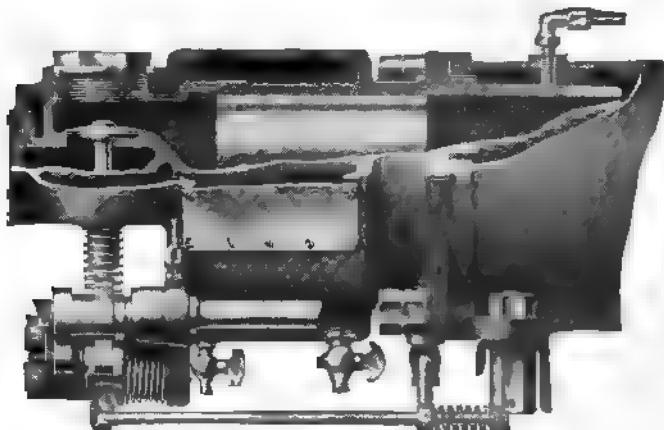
Part Sectional View of the Olds Motor, showing valve-operating mechanism. The cam-shaft, extending horizontally to the head of the motor, actuates a rocking cam, which in turn pushes both the inlet and exhaust valve stems, projecting below the motor head. The cam shaft is rotated by a helical gear from the main shaft of the engine.
